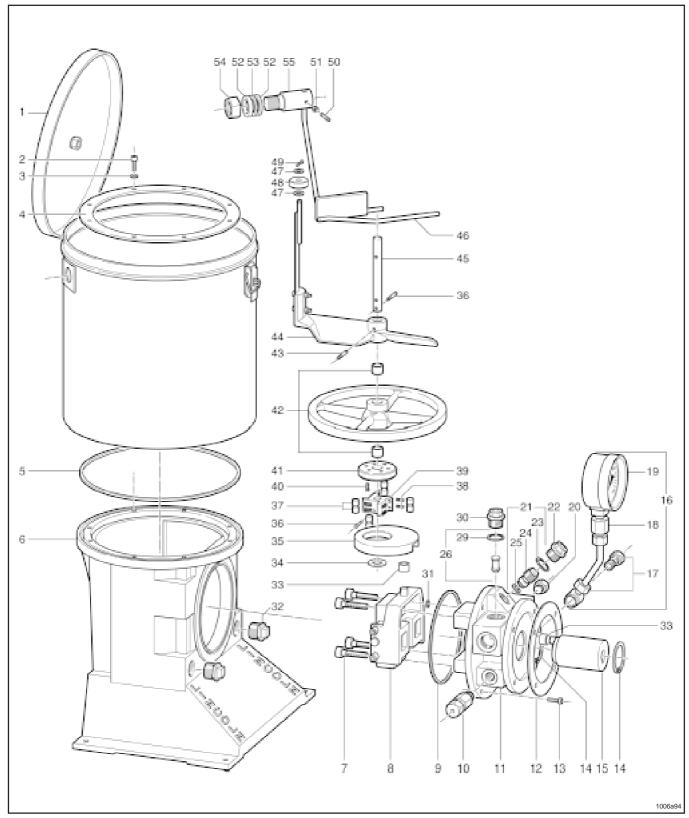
Central lubrication pump ZPU 08/14/24 without drive assemblies
